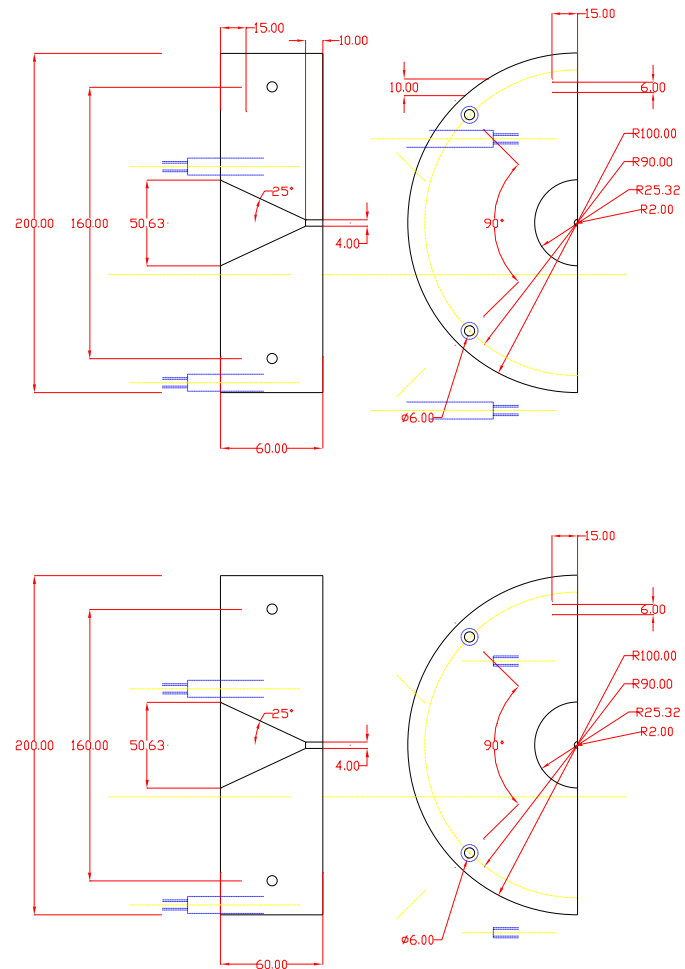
The second half of the mold in two parts (dimensions in mm).
